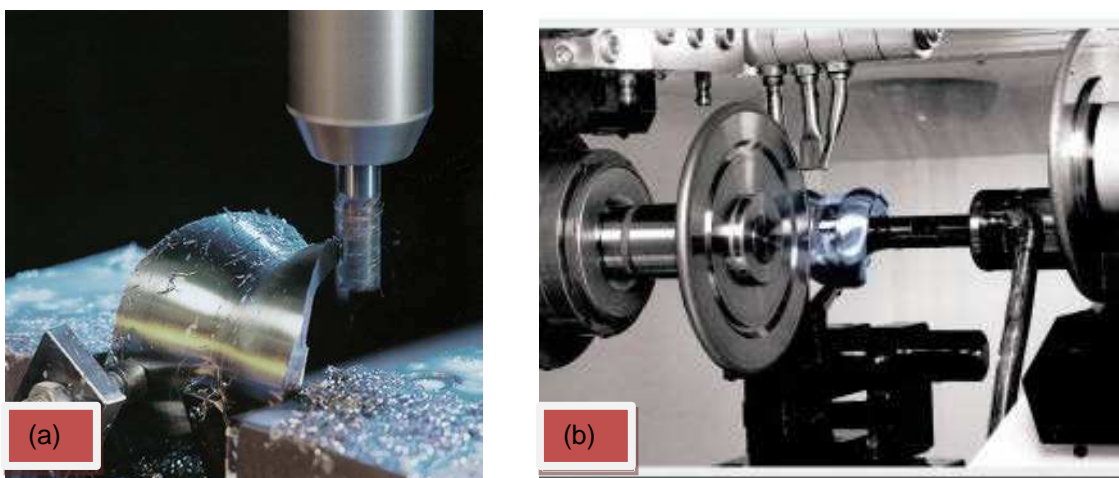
Milling (a) and Grinding (b) of defects after investment casting [169, 170]
